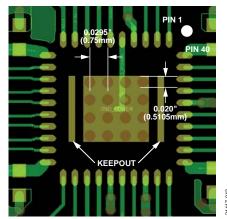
Exposed Paddle Via Array on EVAL-ADIN1300FMCZ
